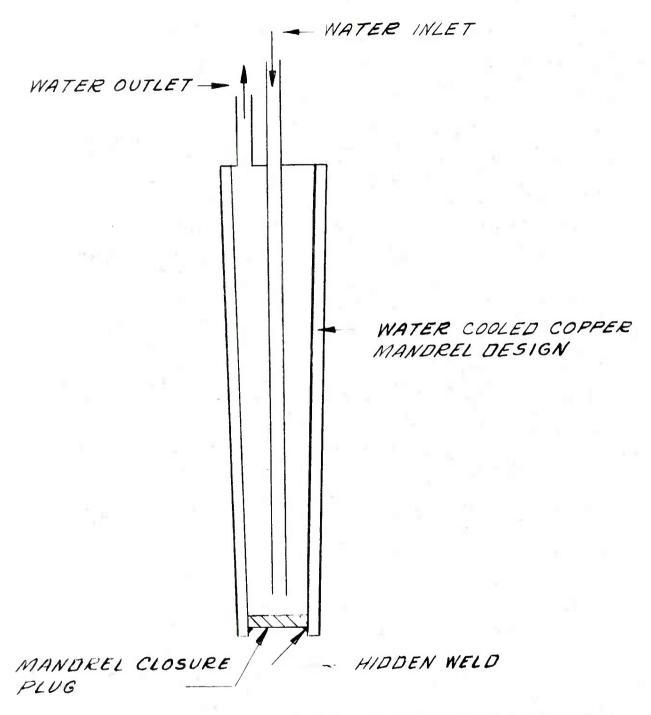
SCHEMATIC SHOWING FABRICATION FEATURES
